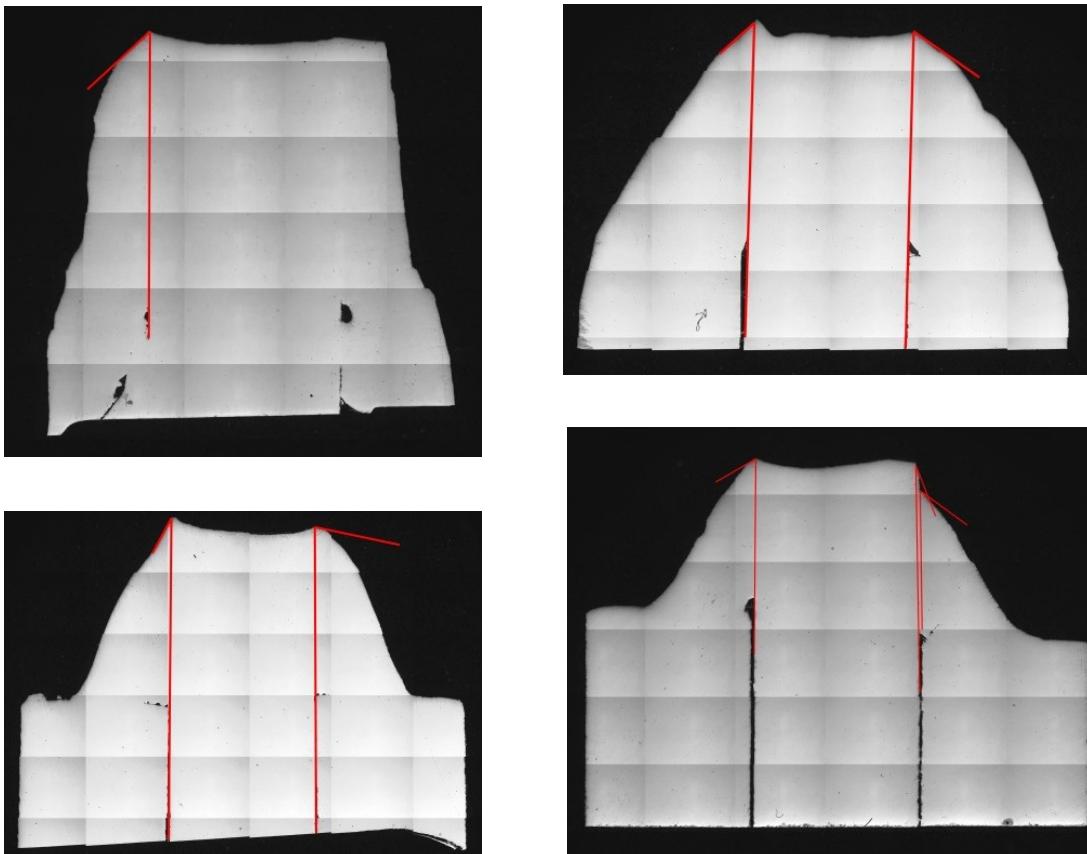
Work-pieces obtained from fatigue tested specimens through a lubricated grinding wheel.
